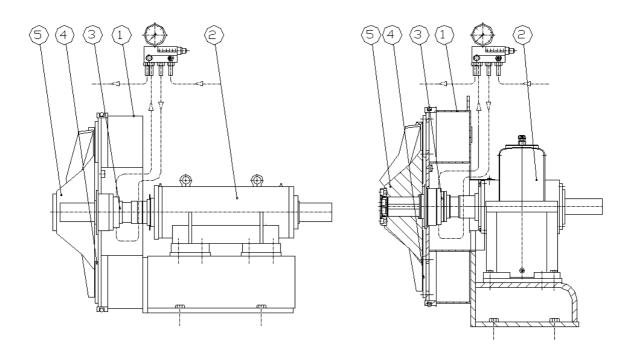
The rotor units, belt-driven on the left and gear-driven on the right (STOA009536)
